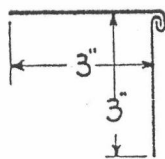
END VIEW OF FINISHED DOUBLE SEAM
